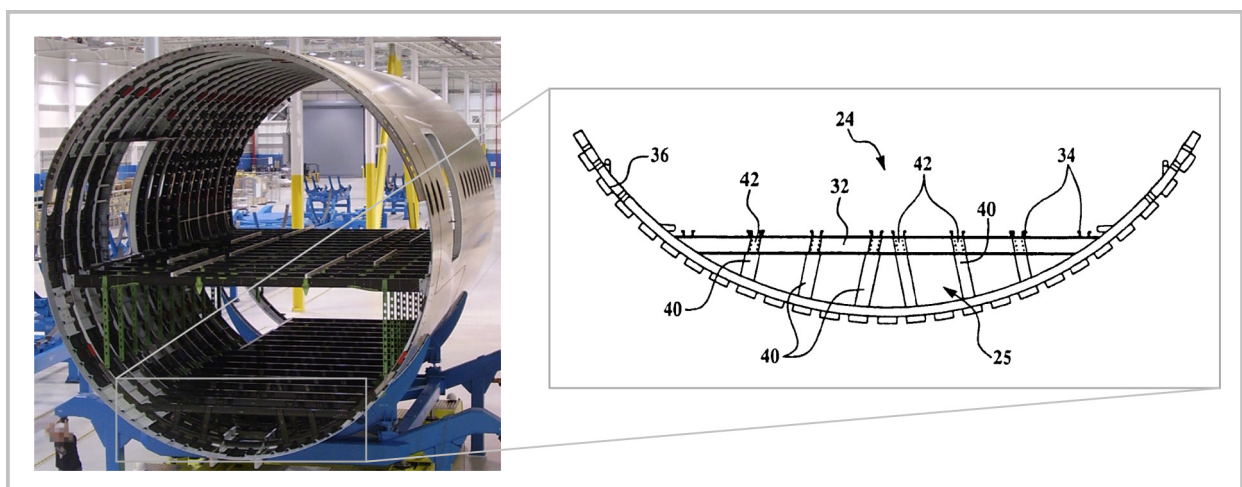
Boeing 787 crash concept (fuselage section 46) [66, 67]
